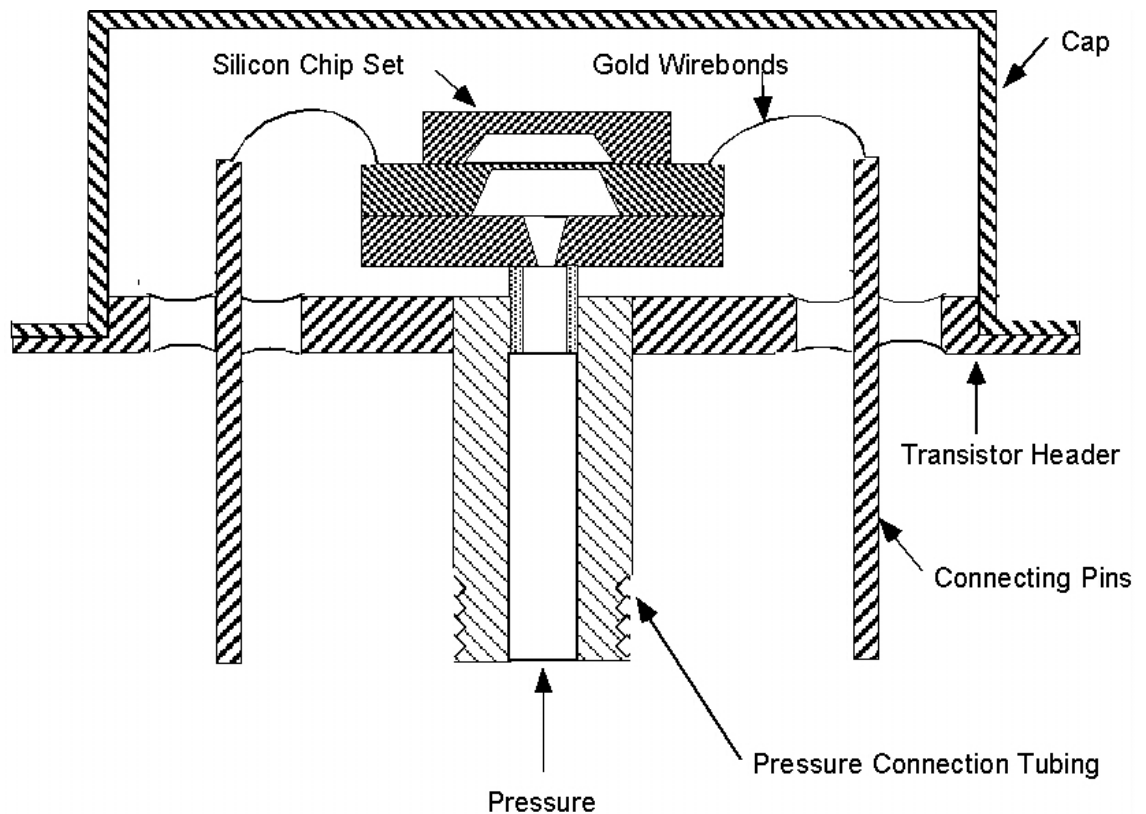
Cross-sectioned view of the SP80 Pressure Sensor with a top chip containing a vacuum reference chamber.
